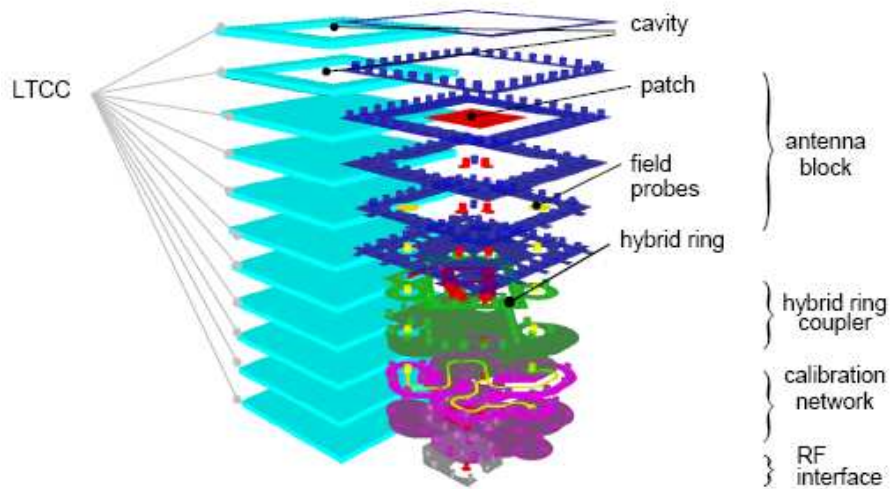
Exploded view of the 11 layer antenna structure in LTCC technology [55]
